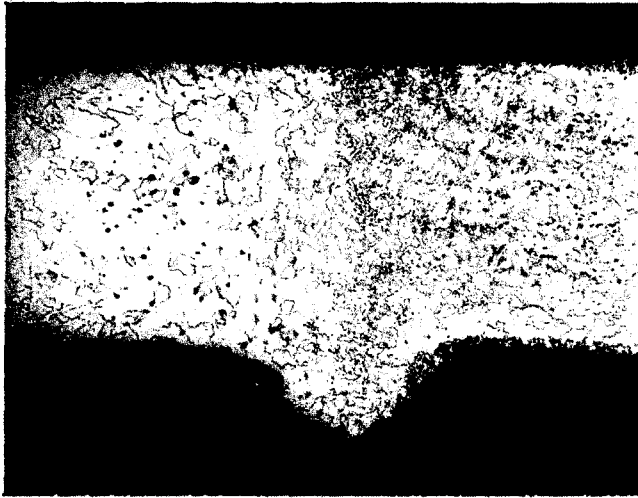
Cross Section Through High-Frequency Weld in 1.25 in. (32 mm) Diameter, 0.043 in. (1.1 mm) Wall Structural Tubing (Magnification 50x)
